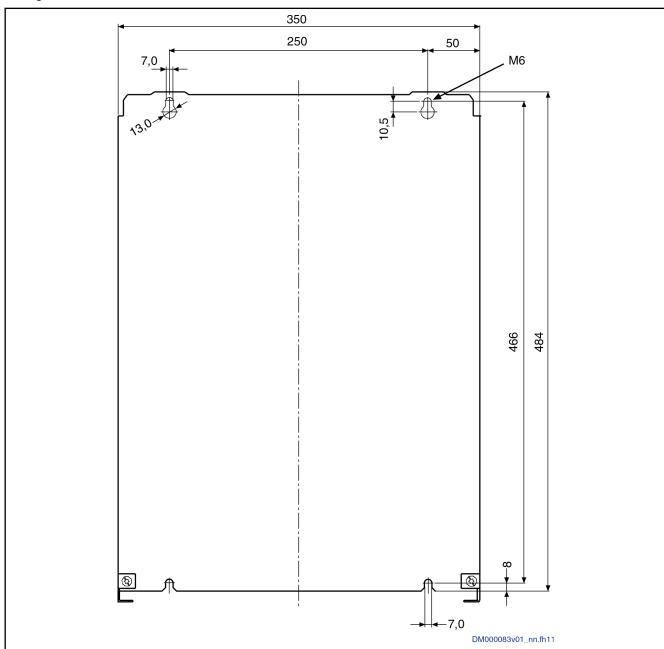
Boring dimensions HCS03.1E-W0210/280/350
